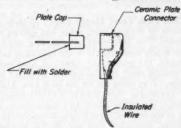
Improvised high-voltage terminal made from junk box parts.
